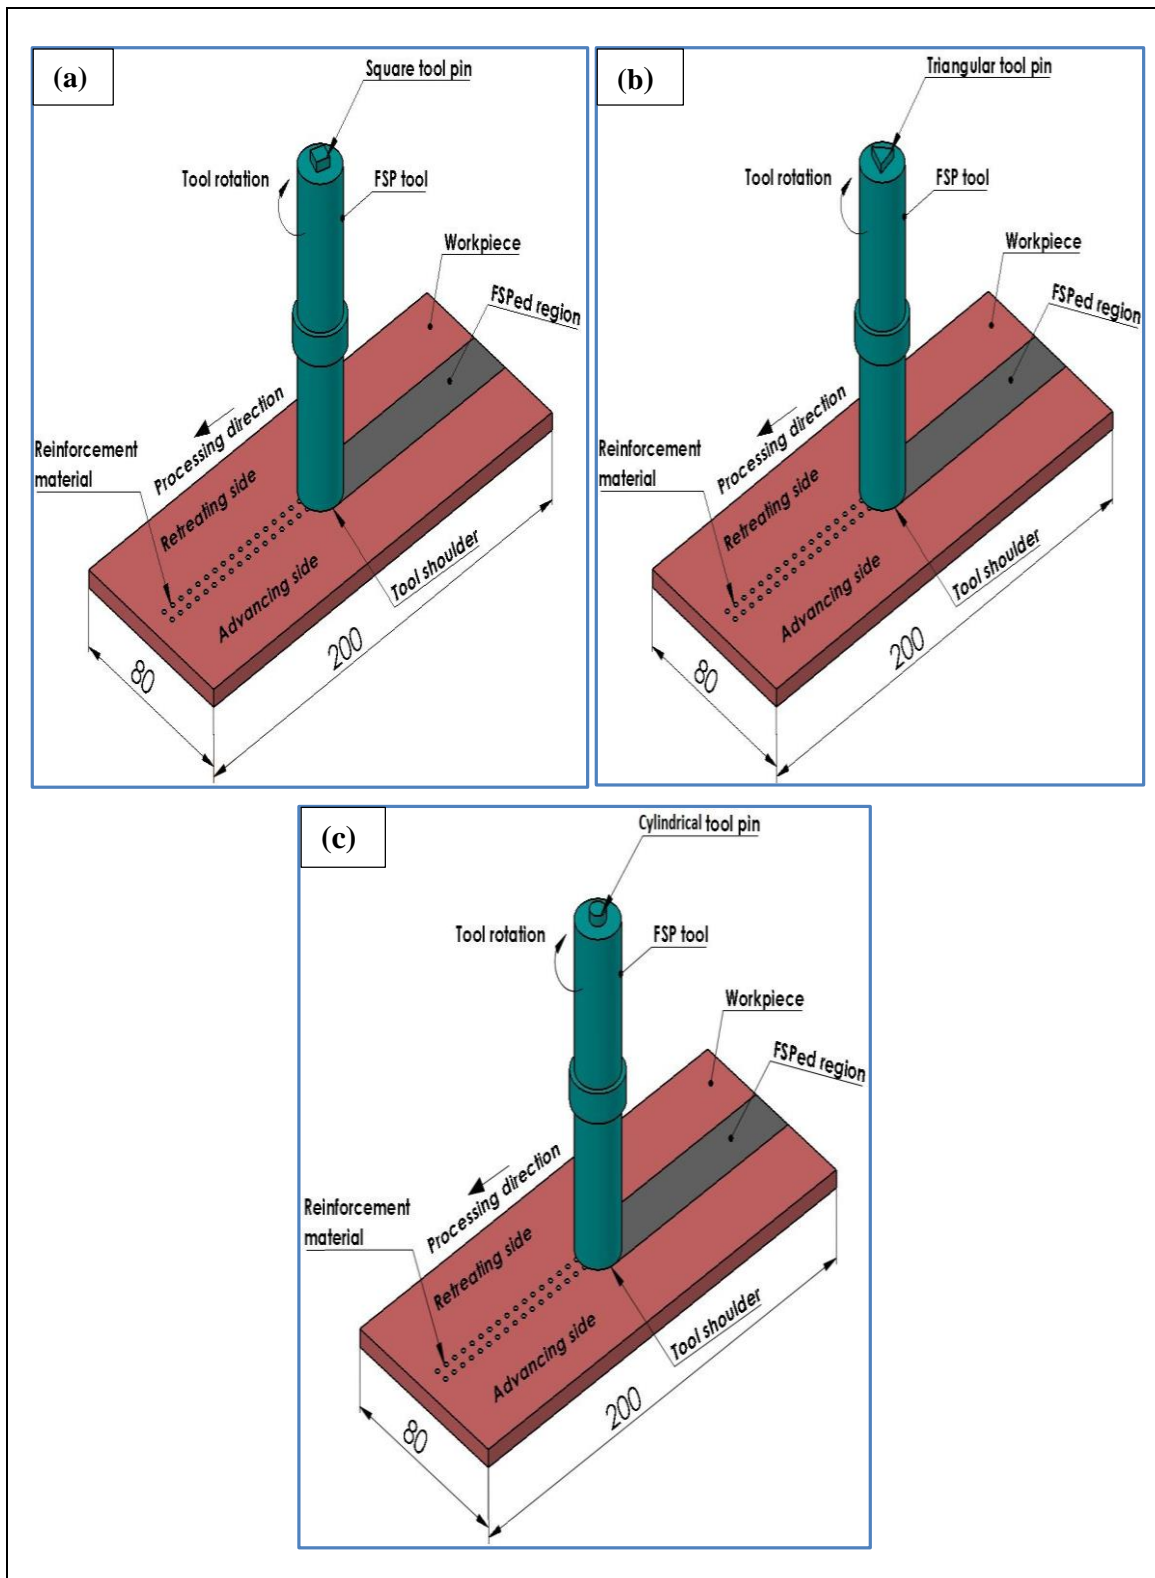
Making holes and formation of SAM in the holes followed by FSP procedure with different tool pins (a) Square tool pin profile(b) Triangular tool pin profile (c) Cylindrical tool pin profile
